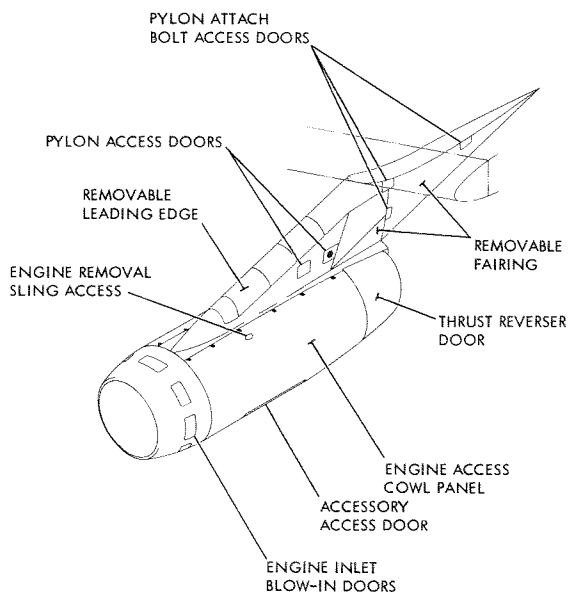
ACCESS AND INSPECTION PROVISIONS, POWER PLANT.
